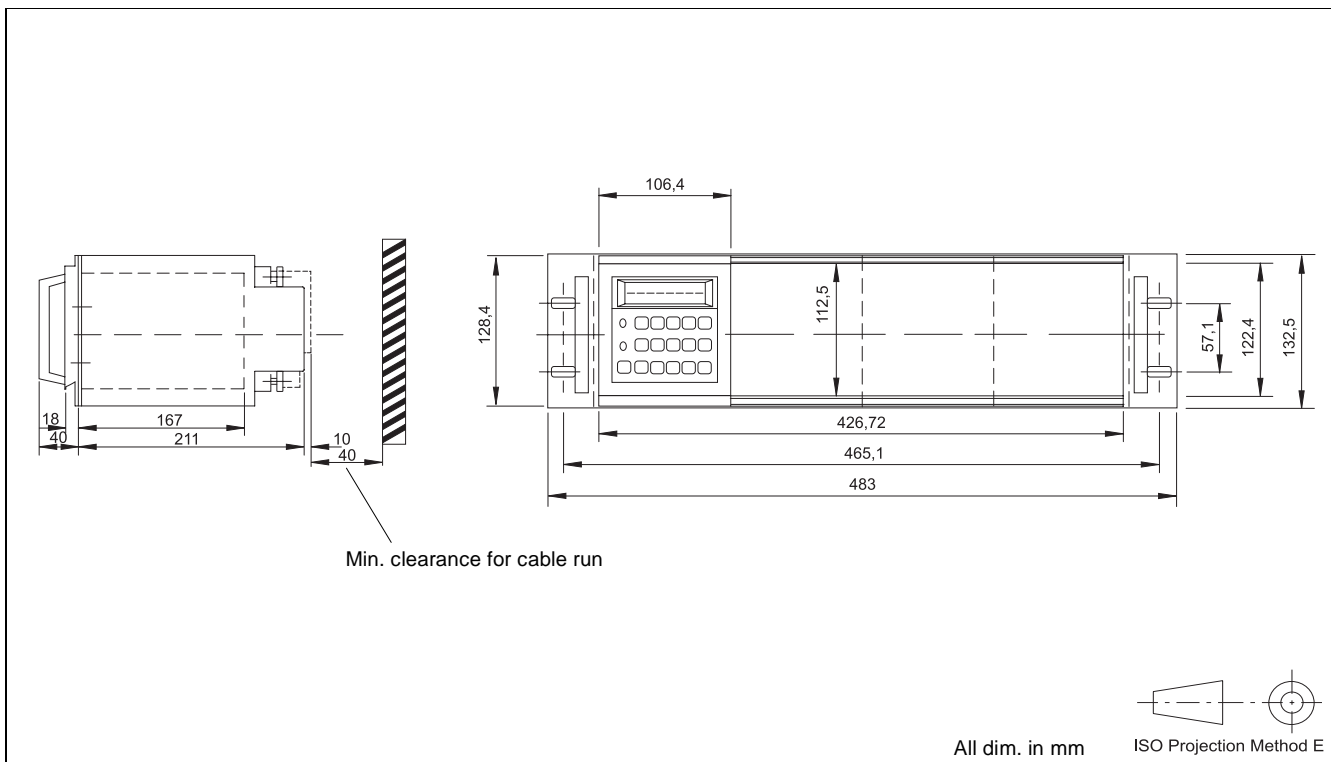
Dimension drawing for 19" rack mounted 50VM1000 converter
